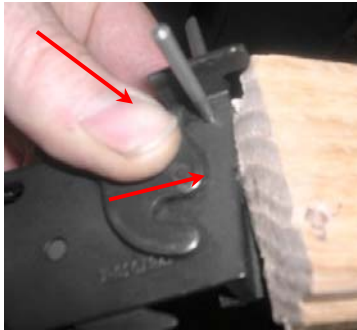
Insert Taper Pin on Left Side to Keep Parts Aligned
